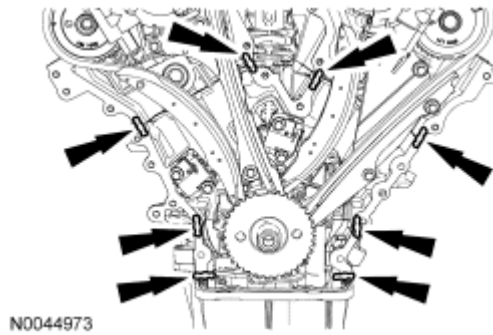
Locating Silicone Gasket & Sealer To Cylinder Block, Lower Cylinder Block, Cylinder Head & Oil Pan Mating Surfaces
